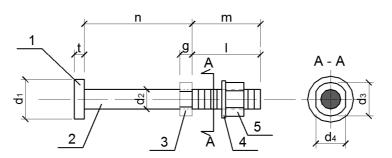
Shear connector: 1 - head, 2 - shank, 3 - flange, 4 -washer, 5 - nut
